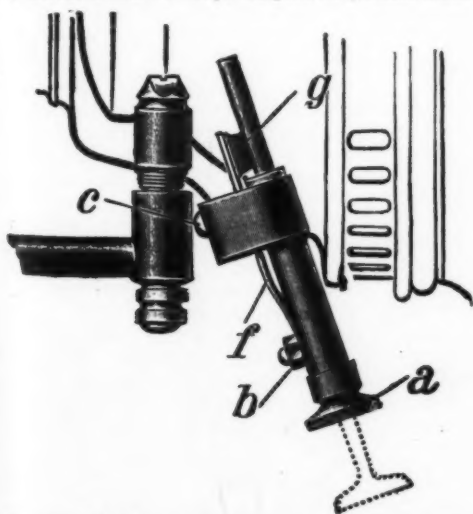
Lighting Attachment for Acetylene Lamp.
